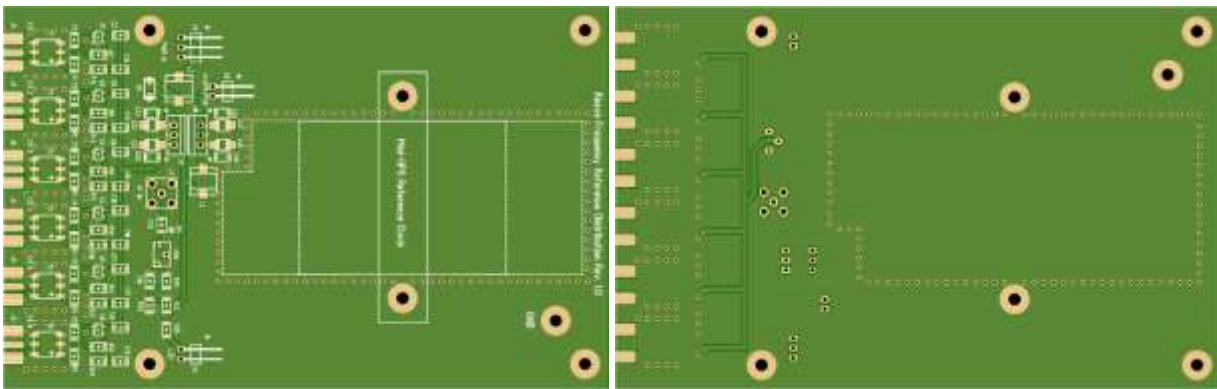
~ Prototype printed circuit board top and bottom images produced from the PCB Gerber files and shown at 50% scale. The PCB is 100 x 160 mm and will fit many extruded aluminum enclosures, such as the Box Enclosures model B3-160. I equipped the PCB with four 3.2 mm diameter holes for mounting in an enclosure that does not have built-in PCB rails. The space dedicated to the Mini-GPS Reference Clock is seen in the silkscreened open area. In the prototype this unit was mounted with a brass strap fastened with screw fasteners. However, for production, I changed the PCB to use oblong holes so that small nylon tie wraps may be used in place of the metal strap and screws. The PCB may be used without the Mini-GPS Reference Clock and cut in half to fit an 80 mm long enclosure (such as the Box Enclosures B3-080). Image ©2020 W. Reeve
